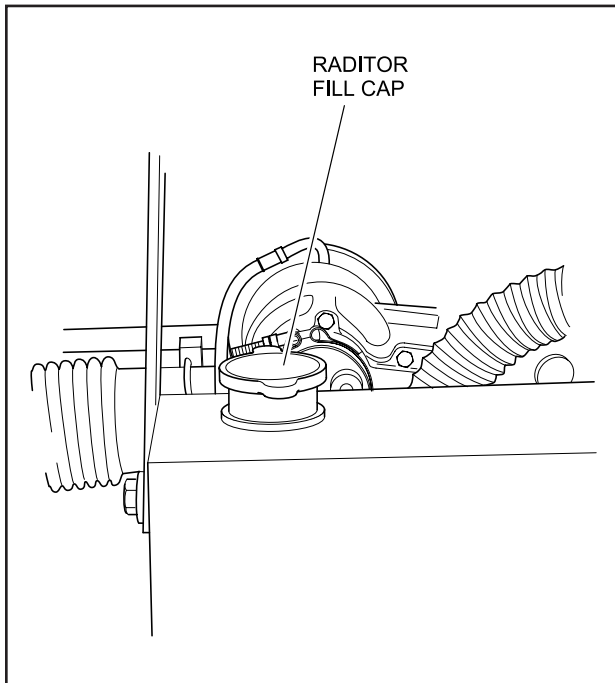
ENGINE RADIATOR FILL CAP
